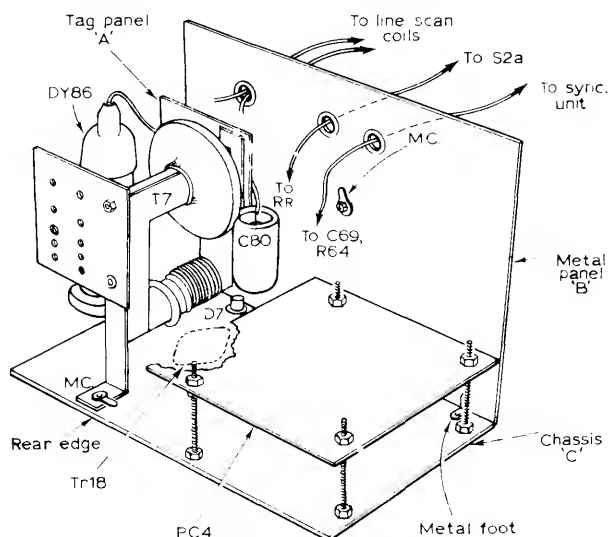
The complete line timebase unit. This shows how the component parts—the line output transformer, board PC4, chassis "C", etc.—are related when the unit is made up. Note the mounting arrangement of Tr18 (see also Fig. 31) beneath chassis "C" which acts as its heat-sink.
